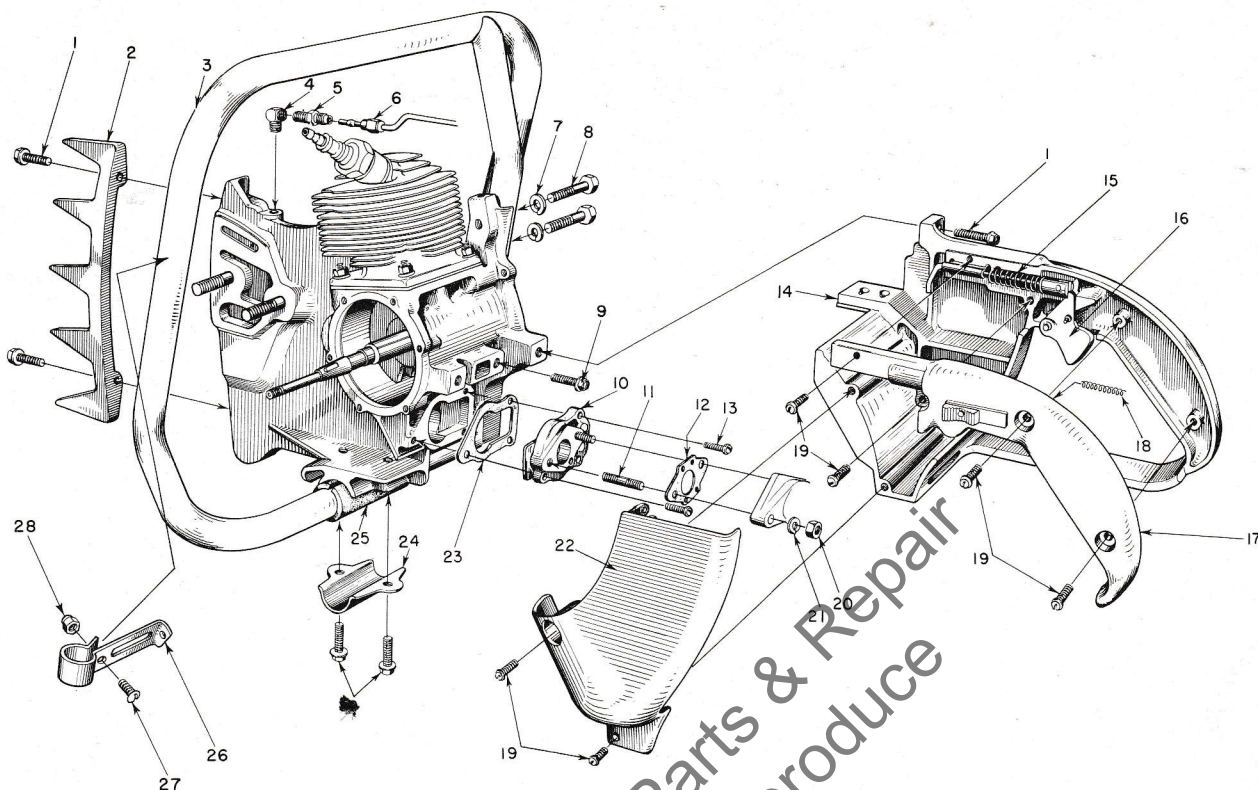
HANDLE, GRIP AND REED VALVE PARTS
